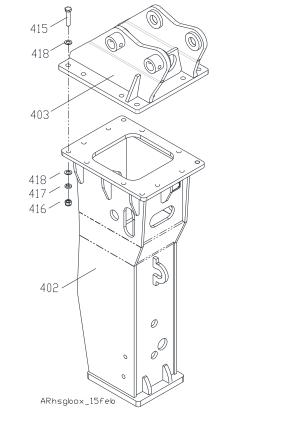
Housing Box, Mounting Bracket, Bolt Set
